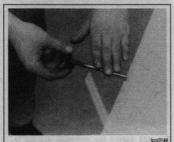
Valve stems may be rolled on a flat surface to check for bends
